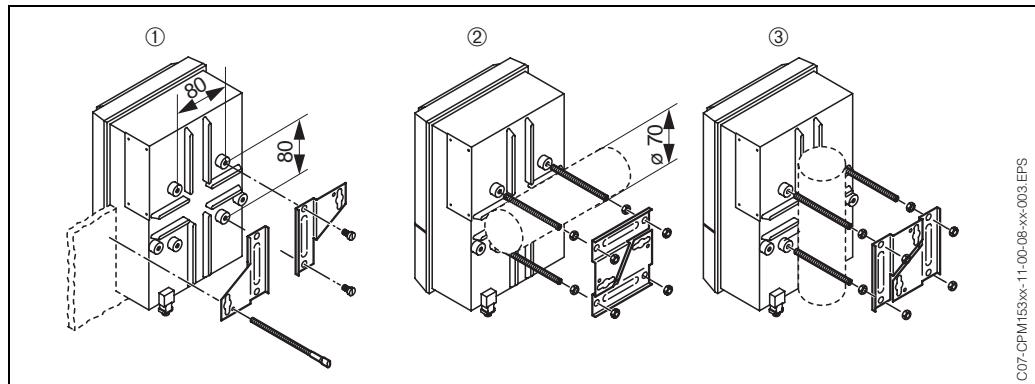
Panel mounting ① and post mounting for CPM 153, horizontal ② and vertical ③
